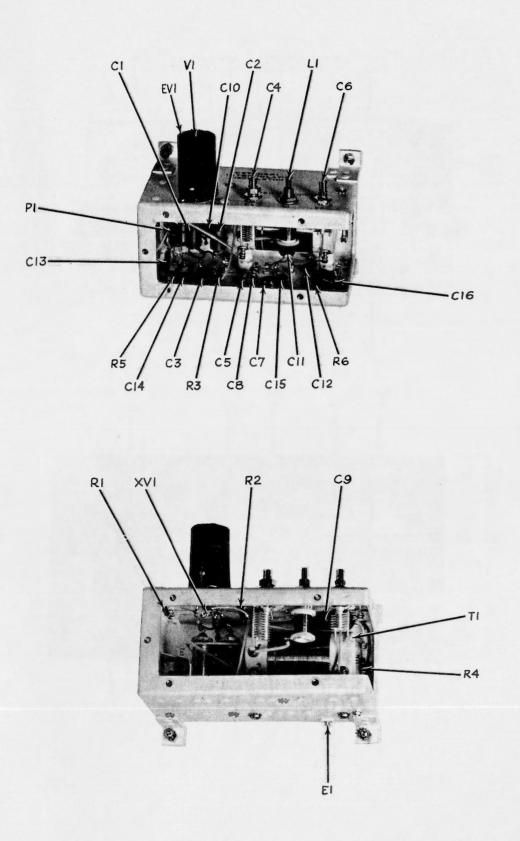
Interpolator Oscillator A1A13, Parts Location and Test Points
